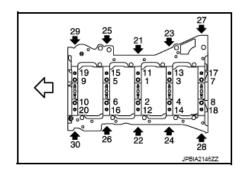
Main Bearing Cap Bolts And Sub Bolts Tightening Sequence Courtesy of NISSAN MOTOR CO., U.S.A.
